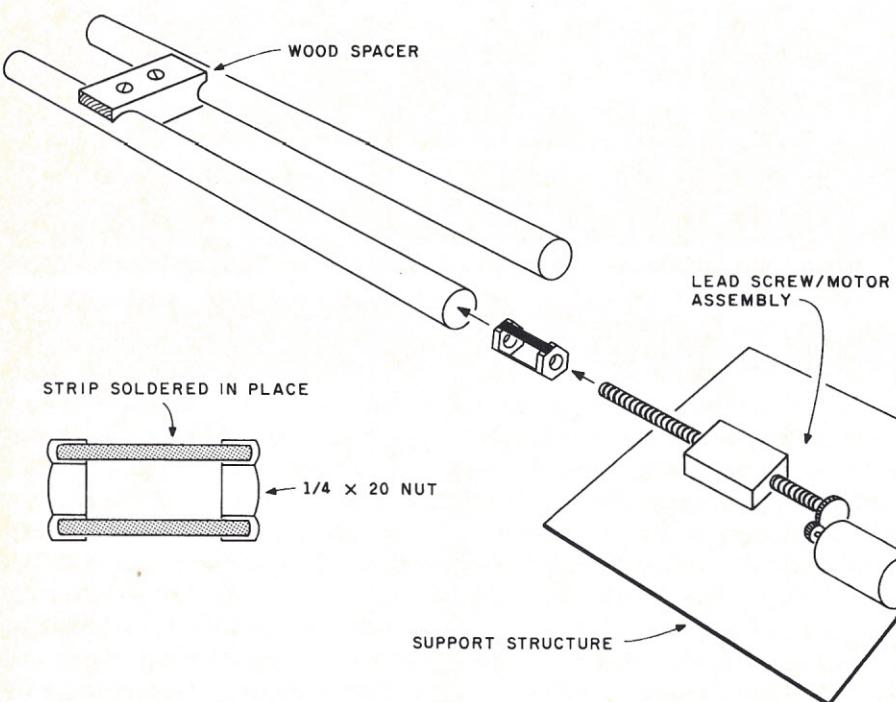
Details of arm construction. Carriage made of two $\frac{1}{4}$ by 20 threaded nuts held together by thin strips of metal. Also shown is the relationship between support tubes, carriage, and lead screw assembly.
